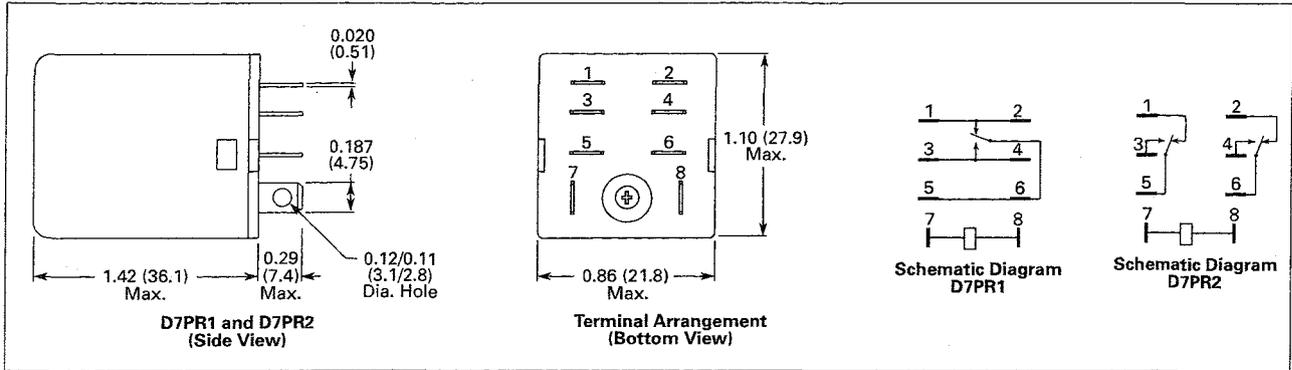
D7PR1 and D7PR2 — Approximate Dimensions in Inches (mm)
